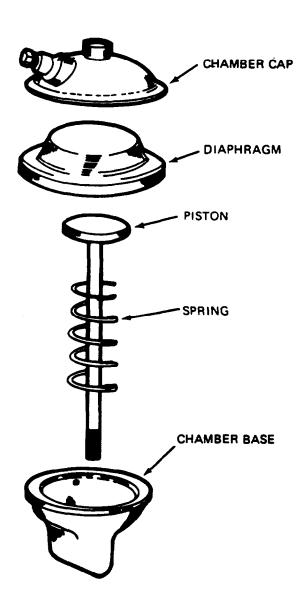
Disassemble/Reassemble Bitumeter Air Chamber.
